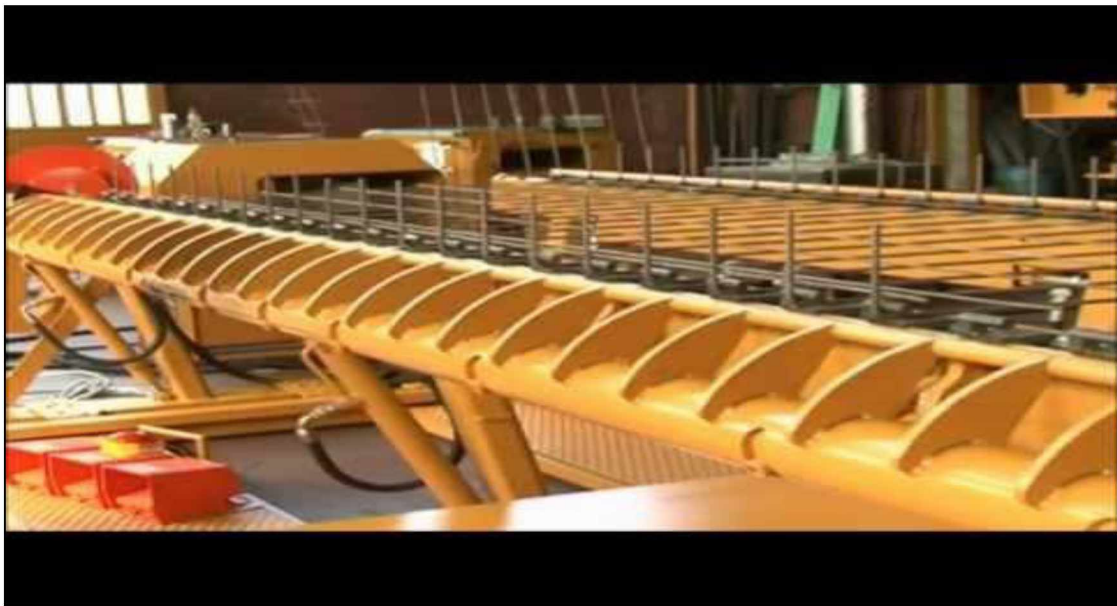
Welded Wire Reinforcement Mesh Bending Machine (Schnell 2015)
